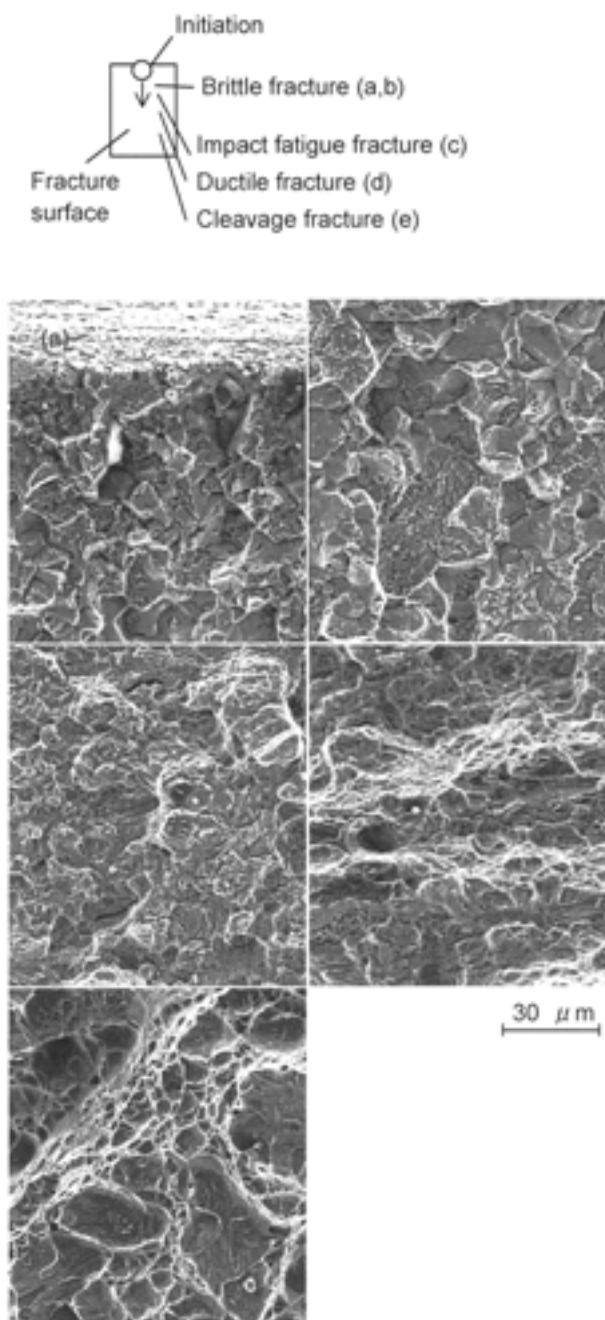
SEM fractographs of impact fracture surface of Steel No.3C.
